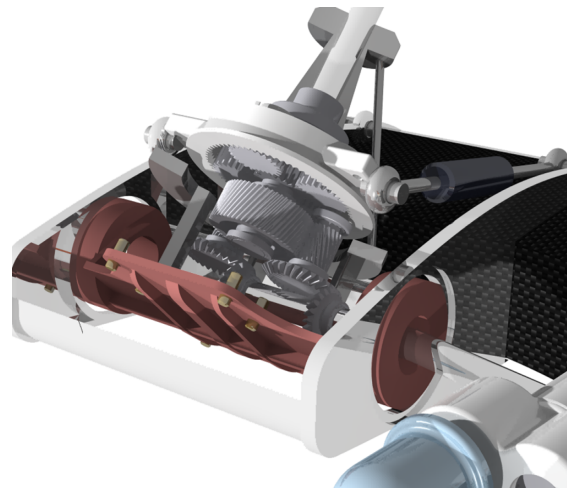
View of split-torque planetary hybrid gearbox and associated tilting mechanisms within the nacelle
